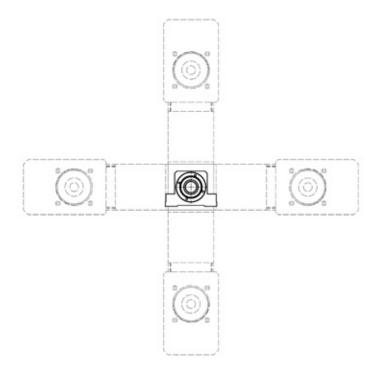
Arrangement of standard deflection belt drives for BSTK bearing units
